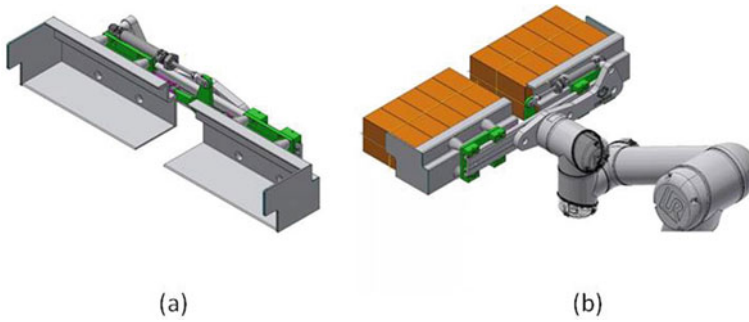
3D modeling: a front view of the robot gripper tool and b the gripper assembled in the robot arm
